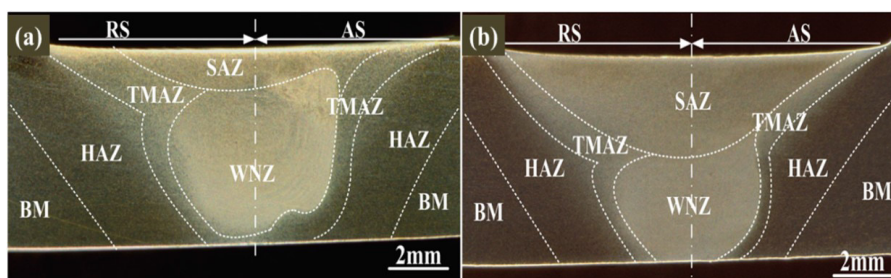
(a) AA2219-T6 weld macrograph of RDR-FSW (b) Macrograph of conventional FSW at 1800 rpm tool rotation and 200 mm/min welding speed. (AS: advancing side, RS: retreating side, BM: base metal, HAZ: heat affected zone, TMAZ: thermomechanically affected zone, SAZ: shoulder affected zone, WNZ: weld nugget zone) [132].
